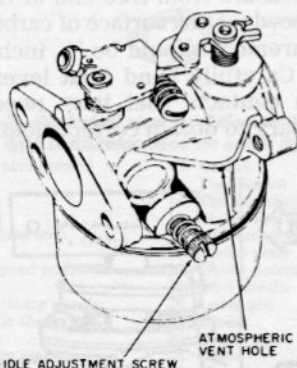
View showing location of vent hole on TVS type fixed main jet carburetor.
